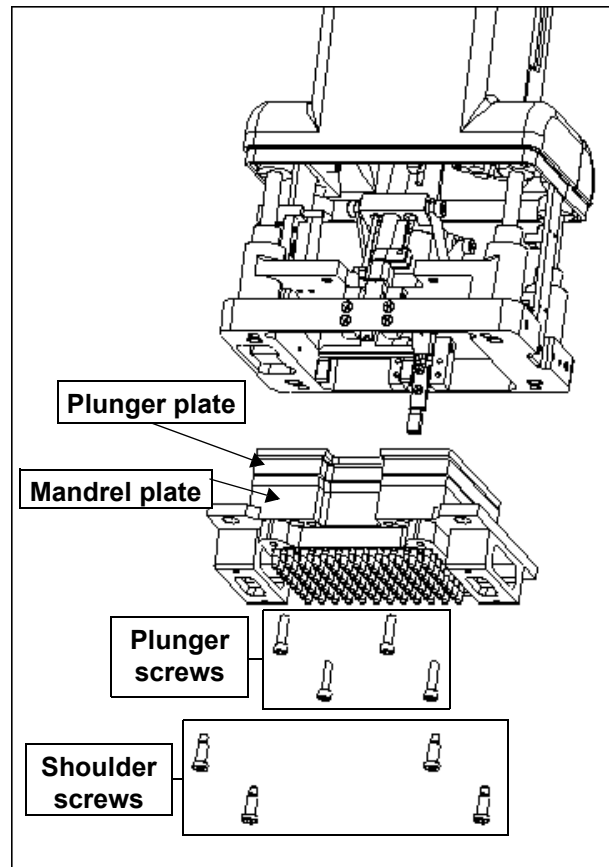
Plunger screws and shoulder screws removed from multichannel head
